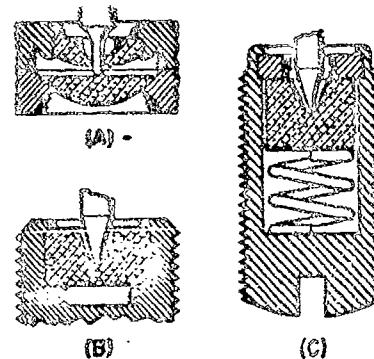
Plain and spring-cushioned V-jewel instrument bearings: (A) Ring and end stone jewel bearing, (B) V-jewel bearing, and (C) Spring-back jewel bearing.
